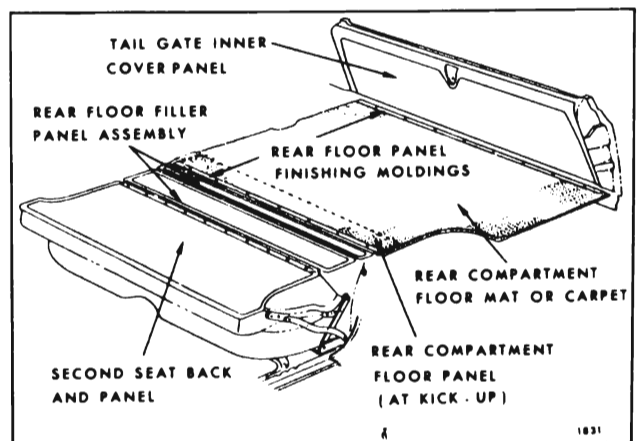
Folding Second Seat and Rear Floor Panel Covering
